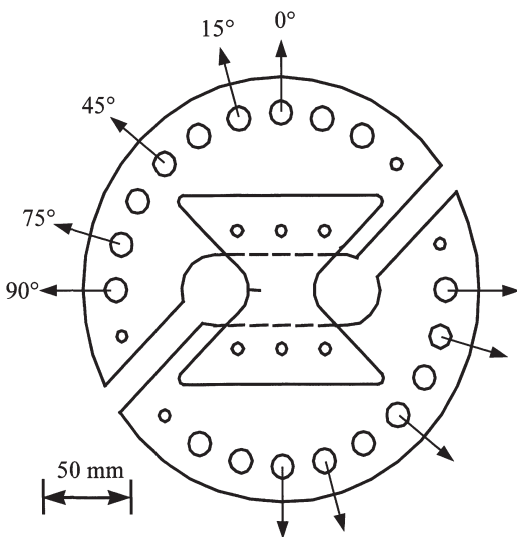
Arcan test fixture used in mixed-mode I/II tests
